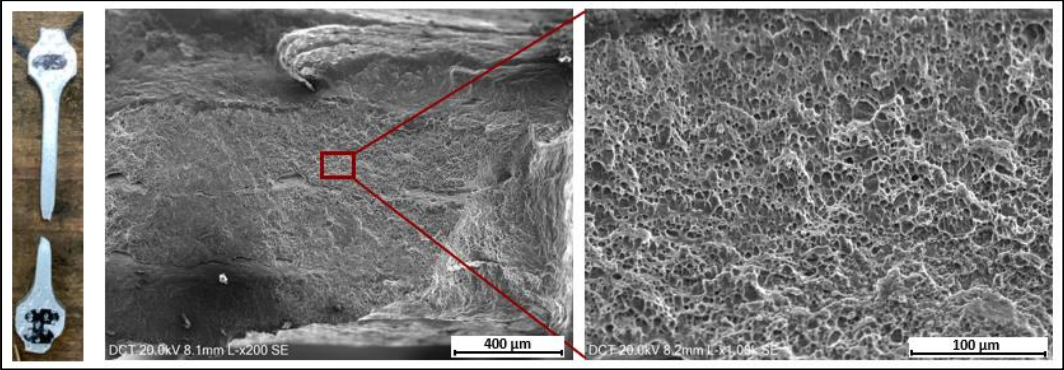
Fracture sample and surface of the TBAR65-H test (sample Horizontal 1).
